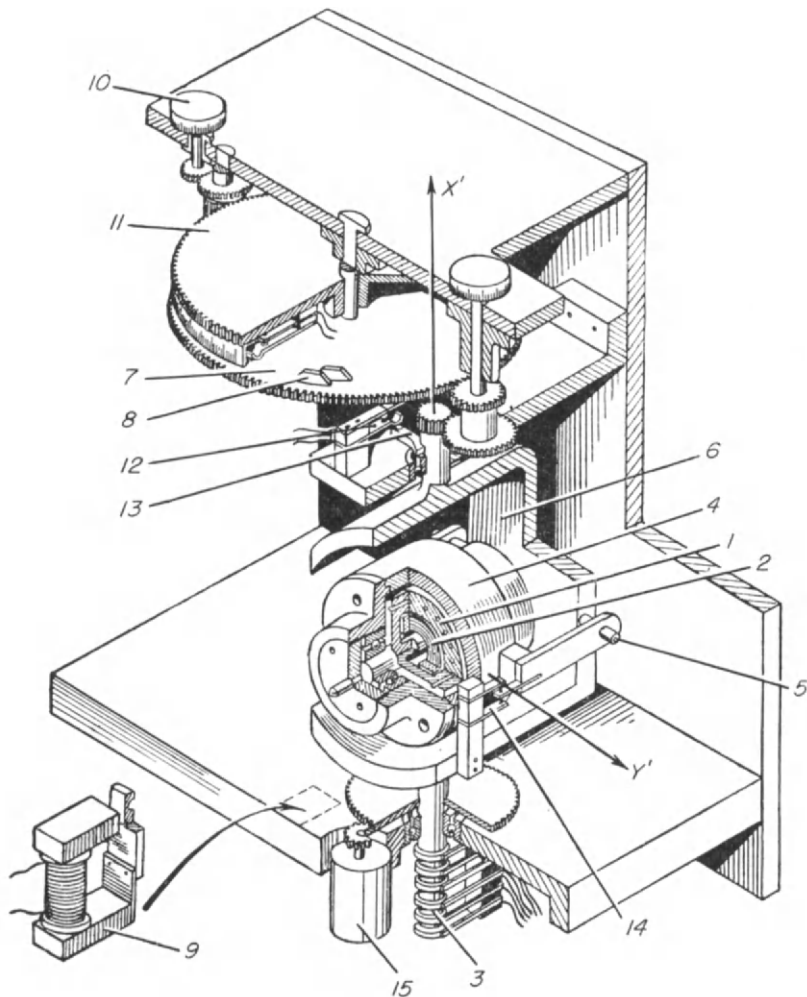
Construction of an integrator: 1, gyroscope rotor; 2, stator winding; 3, slip rings and slide contacts; 4, rotor housing; 5, gyroscope suspension axis; 6, external yoke; 7, gear; 8, motor cut-off cogs; 9, latch; 10, range setting; 11, gear; 12, 13, zeroing contacts; 14, erection contacts; and 15, erection motor.
